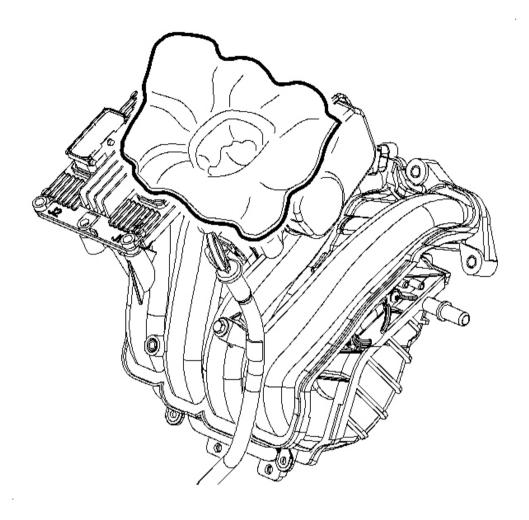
View Of Throttle Body Opening With A Shop Towel Courtesy of GENERAL MOTORS CORP.
